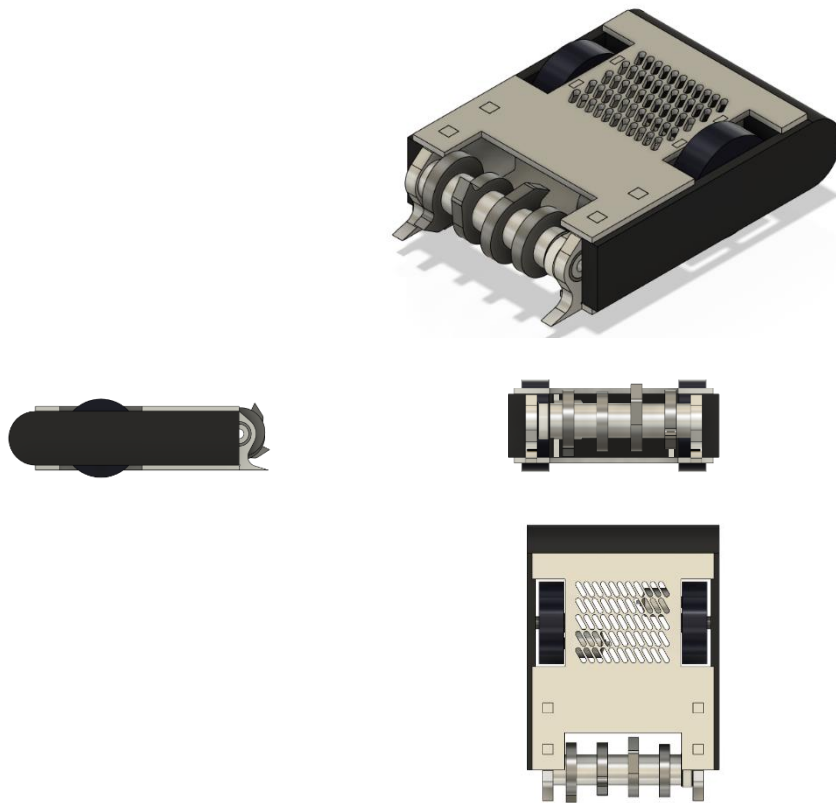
(Front, Side, Bottom & Iso View of Concept III)
